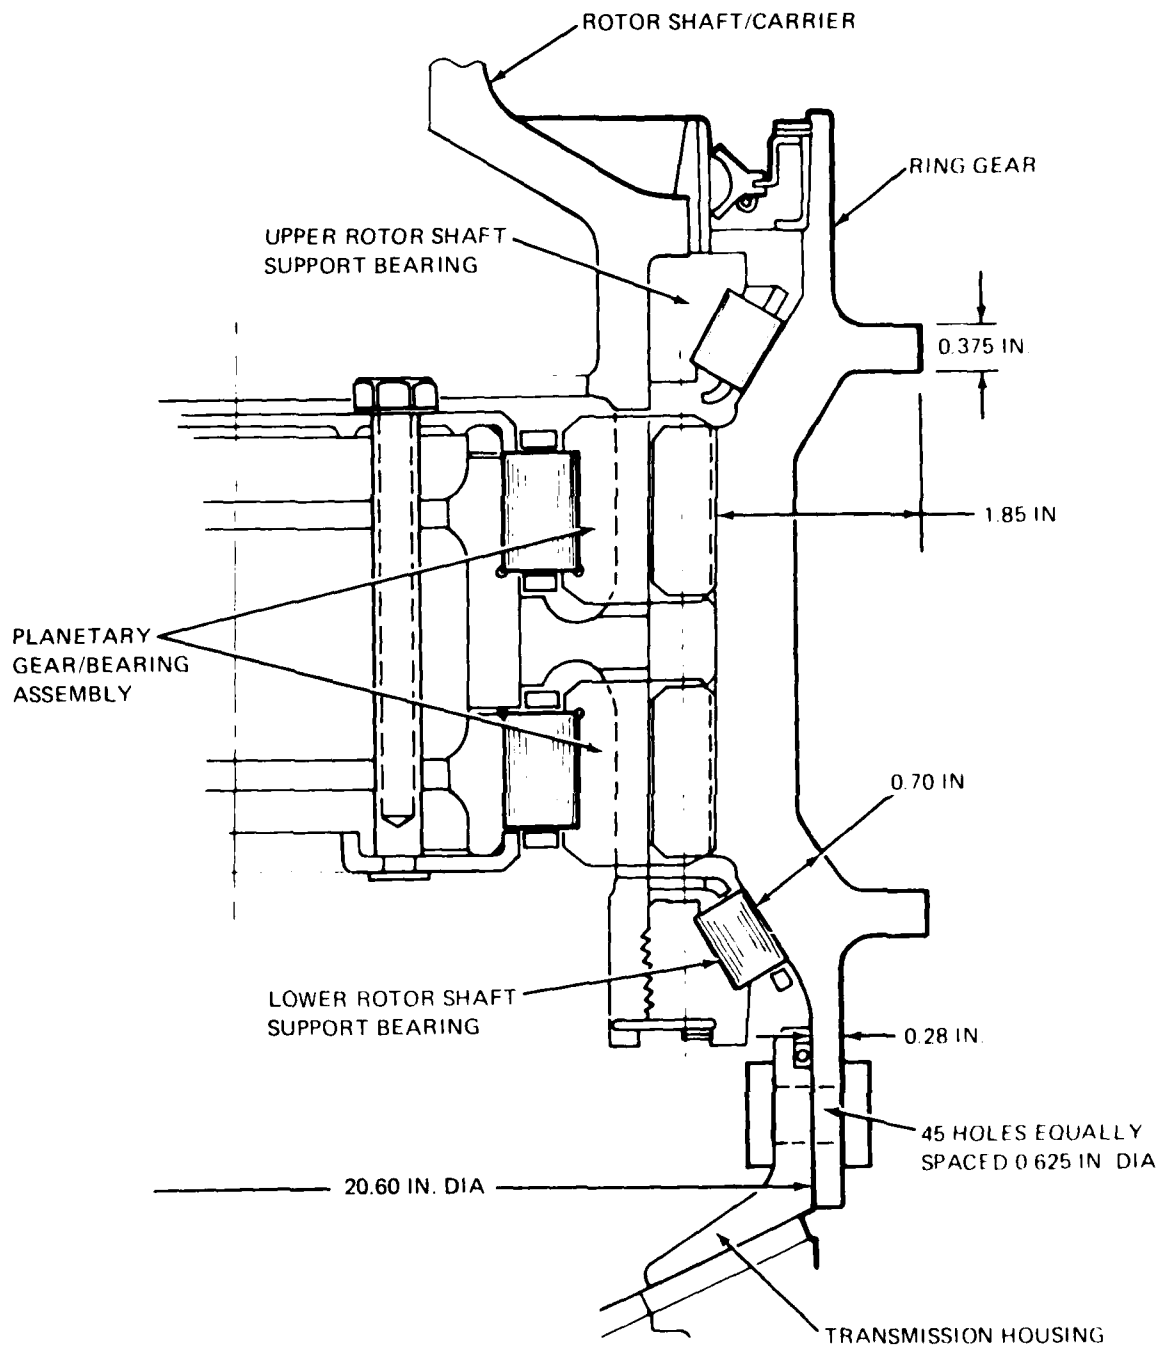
Rotor Shaft/Carrier Support Bearing and Planetary Ring Gear.
